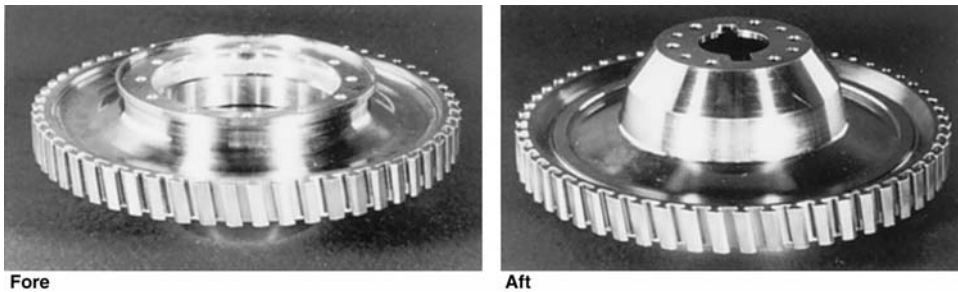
Fully machined P/M Udimet 720 turbine disk produced by extrusion plus isothermal forging. Courtesy of Allison Engine Company
